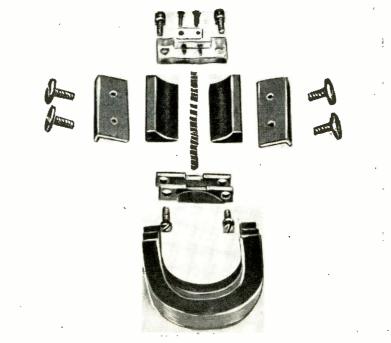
All the parts of the velocity microphone before final assembly. See text for instructions in cutting pole pieces, side clamps, and end brackets.
